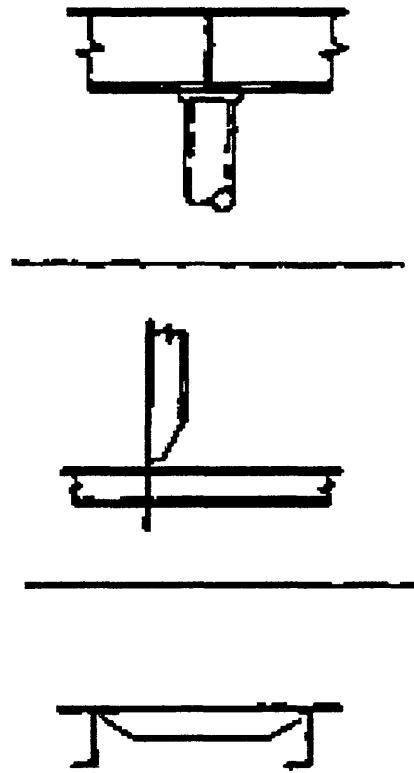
Ship structural details with fillet welds [2]
